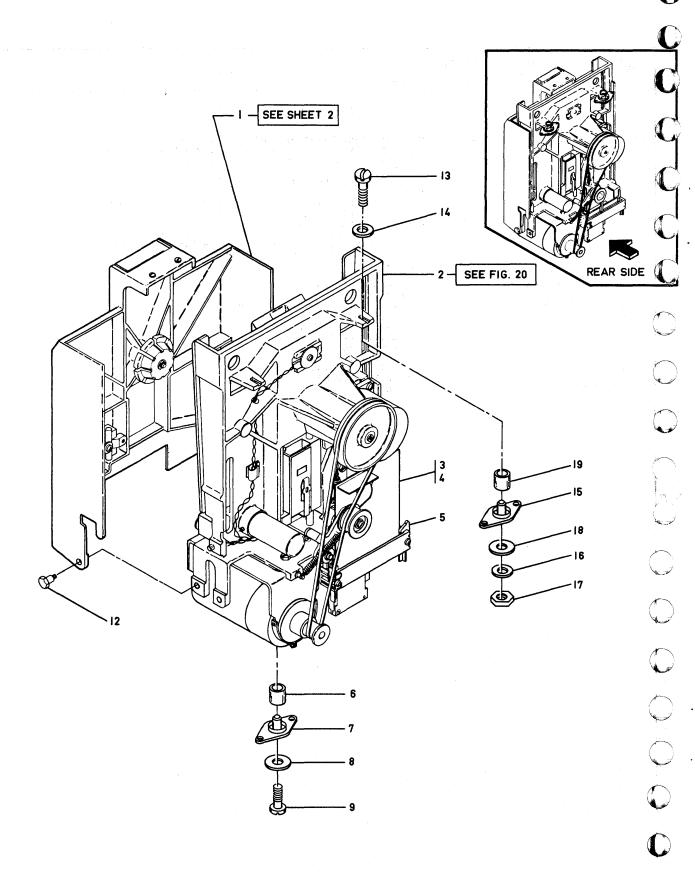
DISKETTE STORAGE DRIVE ASSEMBLY,53 FD (SHEET 1 OF 2,1NDEX NO. 1 THRU 19)
